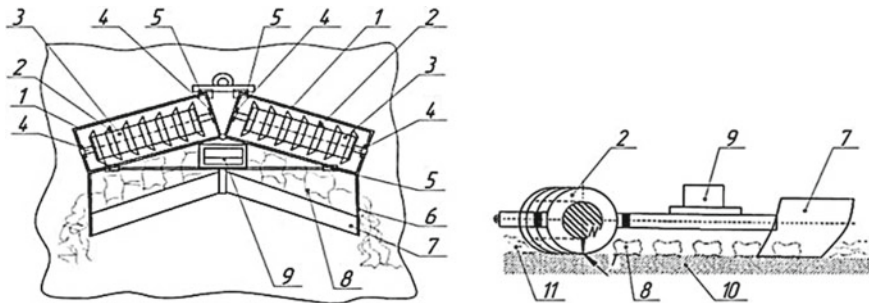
Device for removal from the road surface of the snow and ice formations: 1—frame; 2—disc cutters; 3—axis; 4—bearings; 5—devices by which the frame can be installed at an angle α to each other in a horizontal plane; 6—stops; 7—mouldboard blade; 8—fragments snow and ice formations; 9—vibrators; 10—road surface; and 11—snow and ice formations
